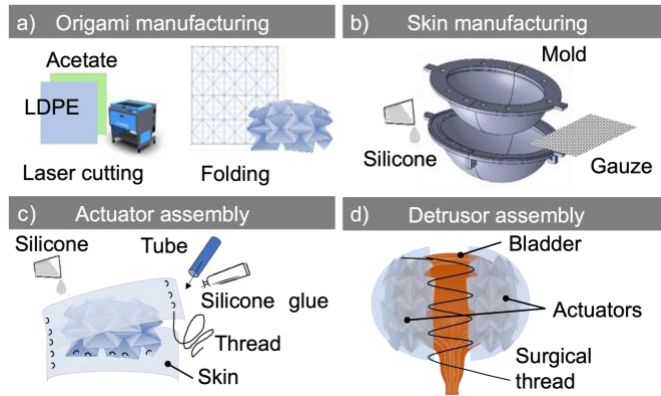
Manufacturing of origami and skins, assembly of a single actuator, and assembly of two actuators to obtain the soft robotic detrusor.
